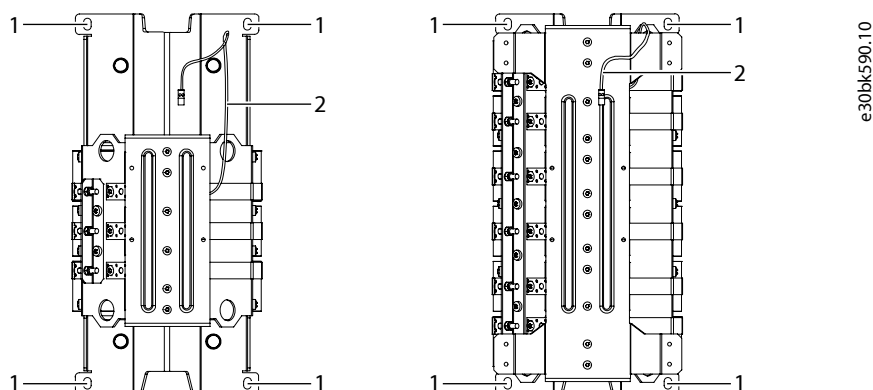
Mounting Holes of the dU/dt Filter Inductor
